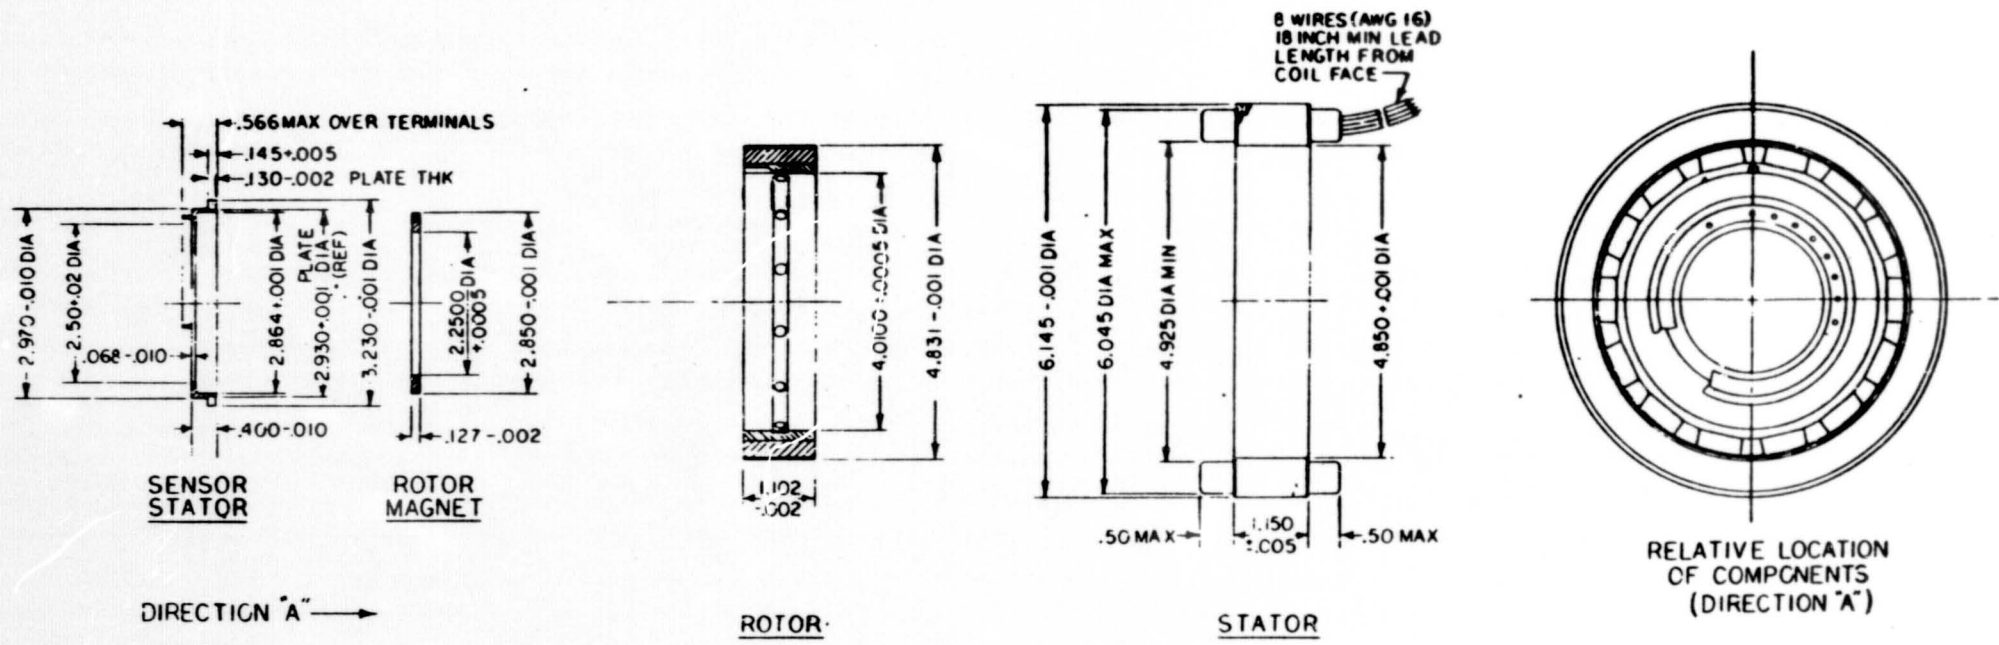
5.0 Ft-Lb Brushless Torque Motor Components
